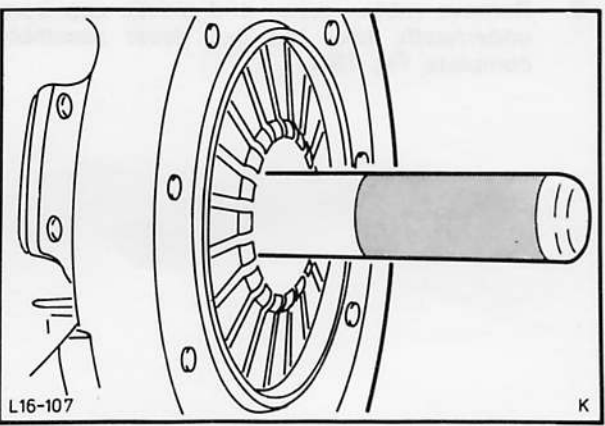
Fit pressure plate and clutch disc using centering tool 21-044/21-080
